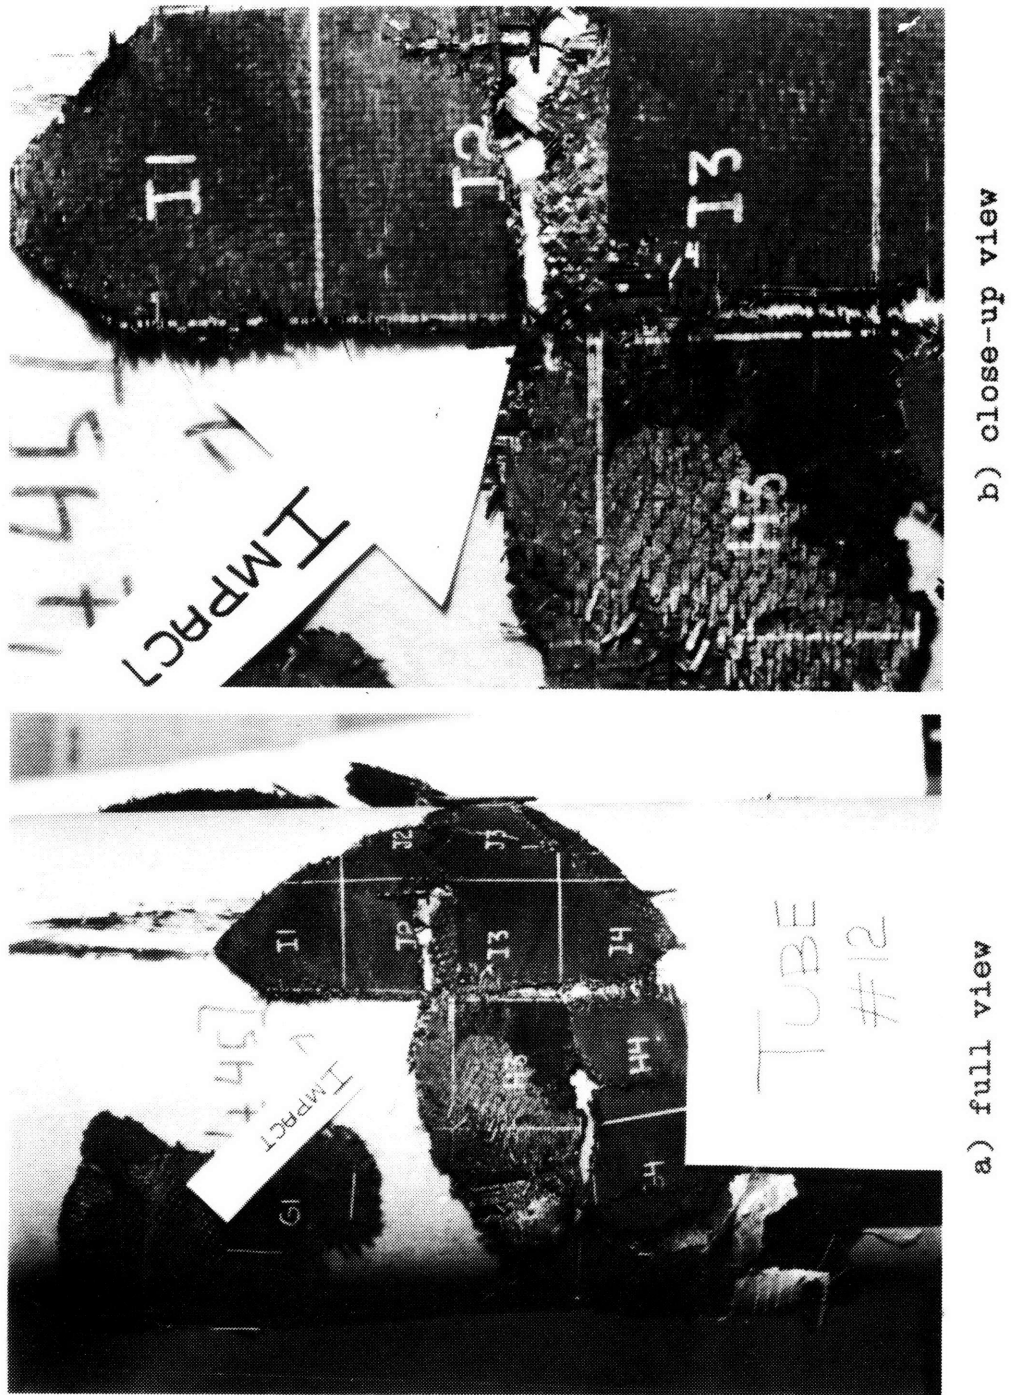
Photograph of Tube 12 Failure through Impact Section - a) Full View and b) Close-up View
